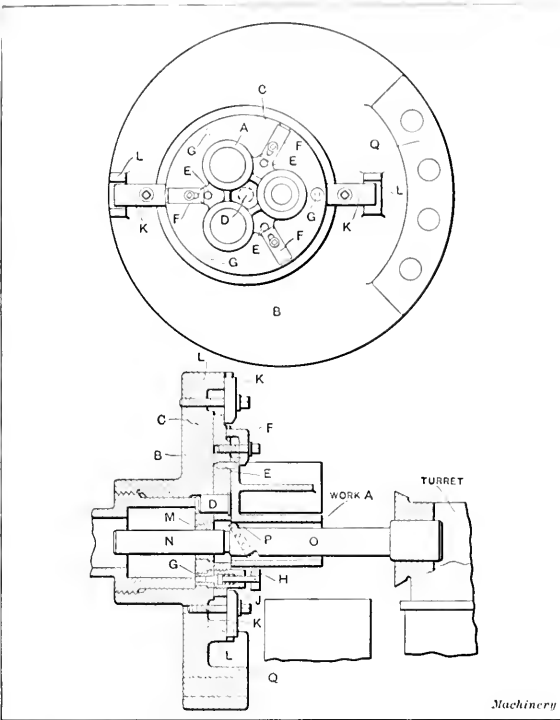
Counterbalanced Indexing Fixture for Triple Cylinder
